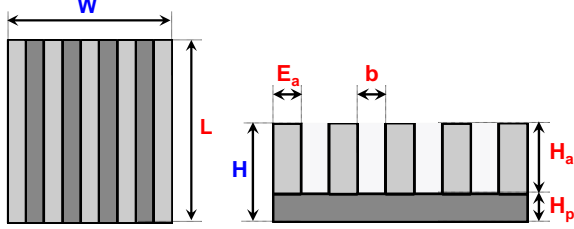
Extruded heatsink dimensions; a) top view; b) front view.
